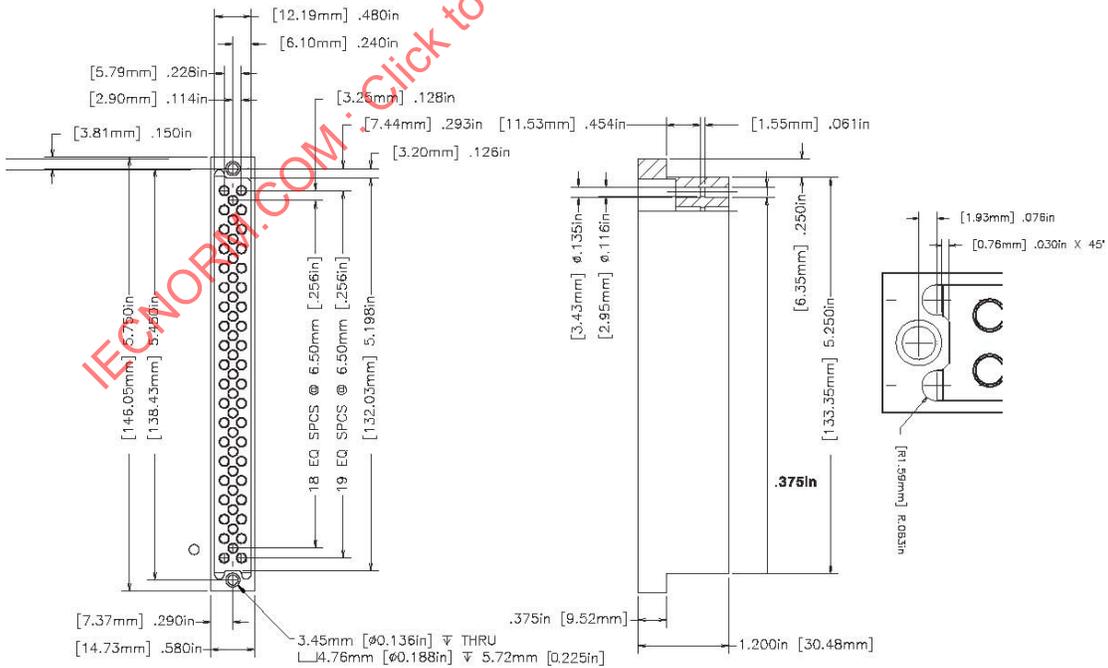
Power module, 59 position for 23 A contact, fixture housing physical layout
